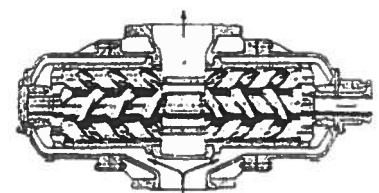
Three-screw double end pump (untimed)
